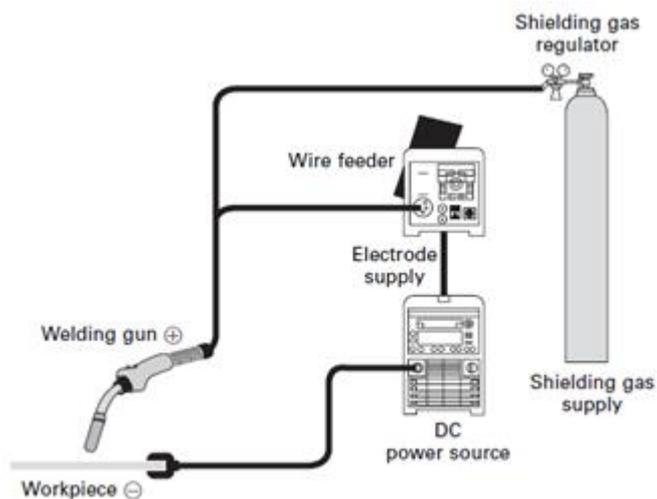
Schematic view of MIG/MAG welding system showing main components [45]
